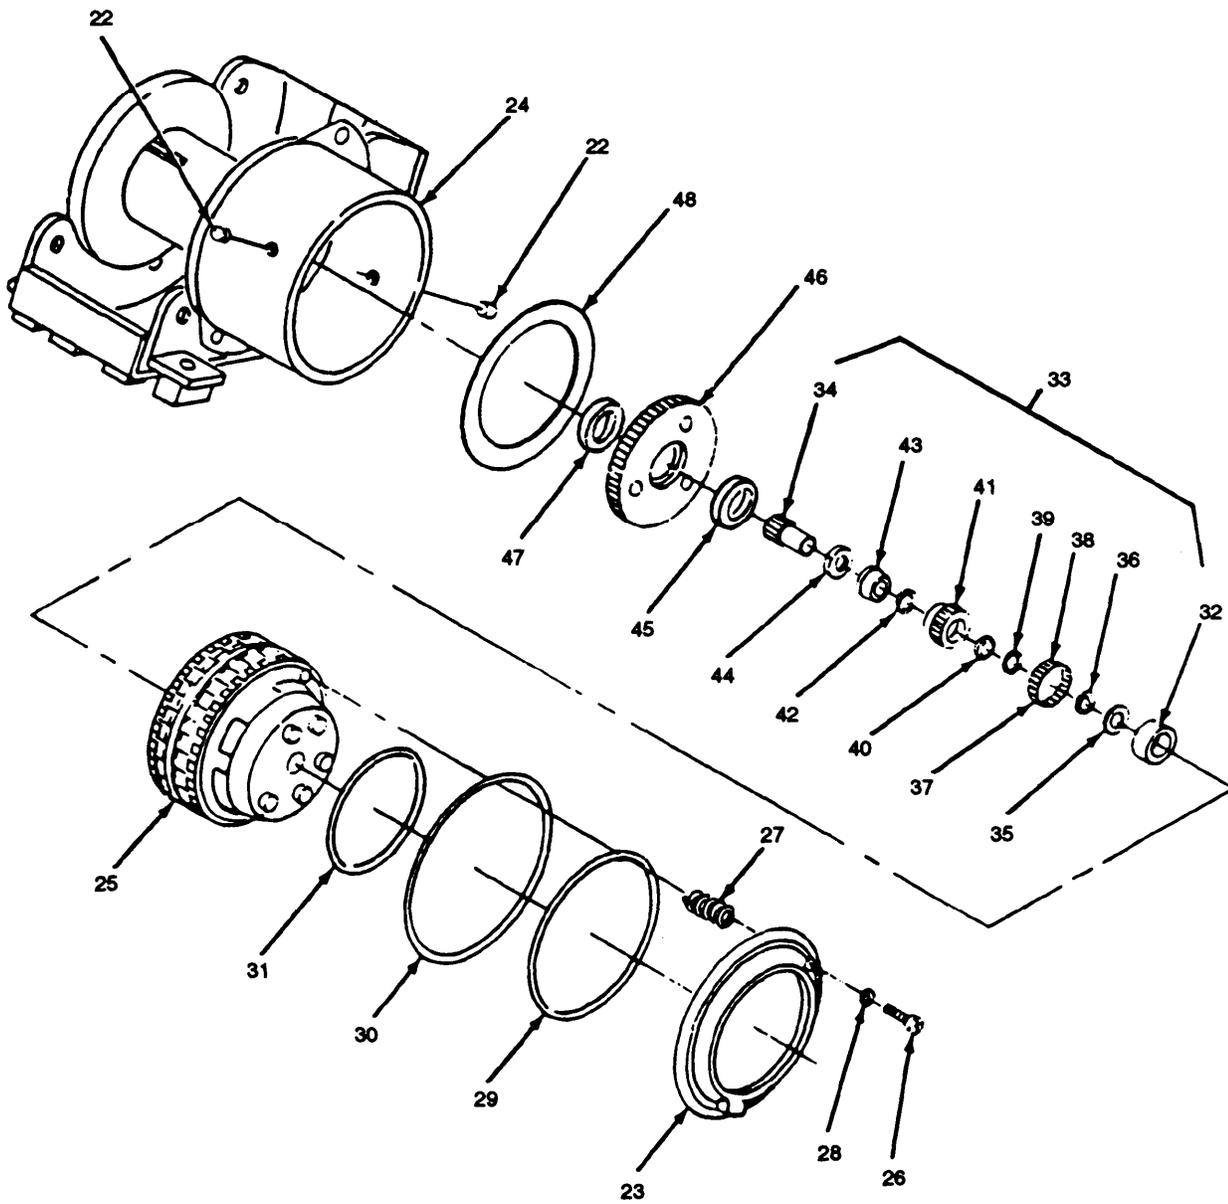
Winch Assembly Model 11-S-EC, Disassembly (Sheet 2 of 3).
